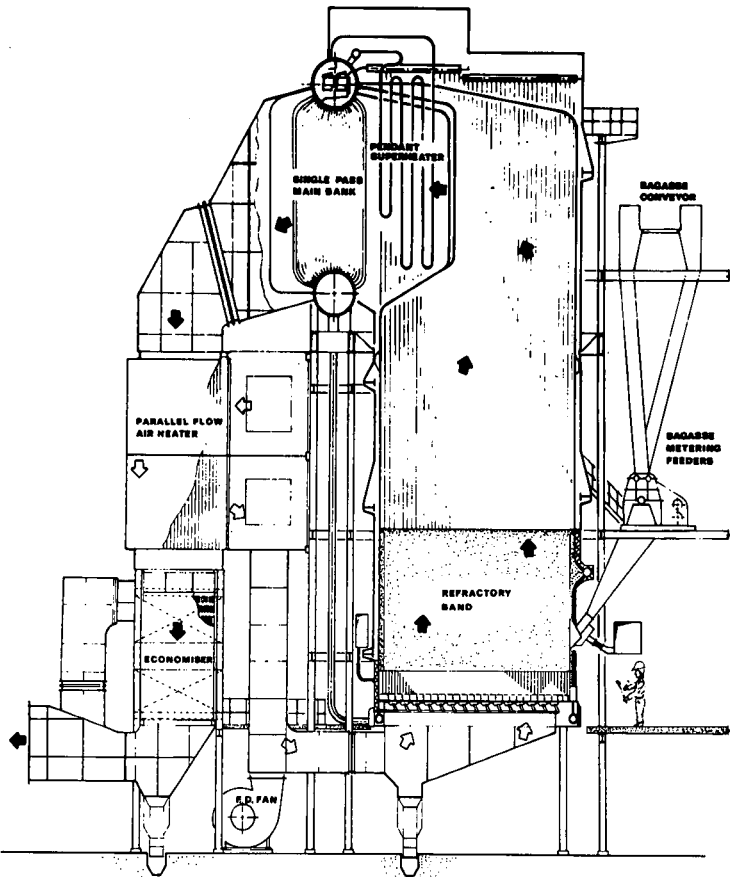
General arrangement of the 204 t/h single pass boiler at Malelane Sugar Mill
